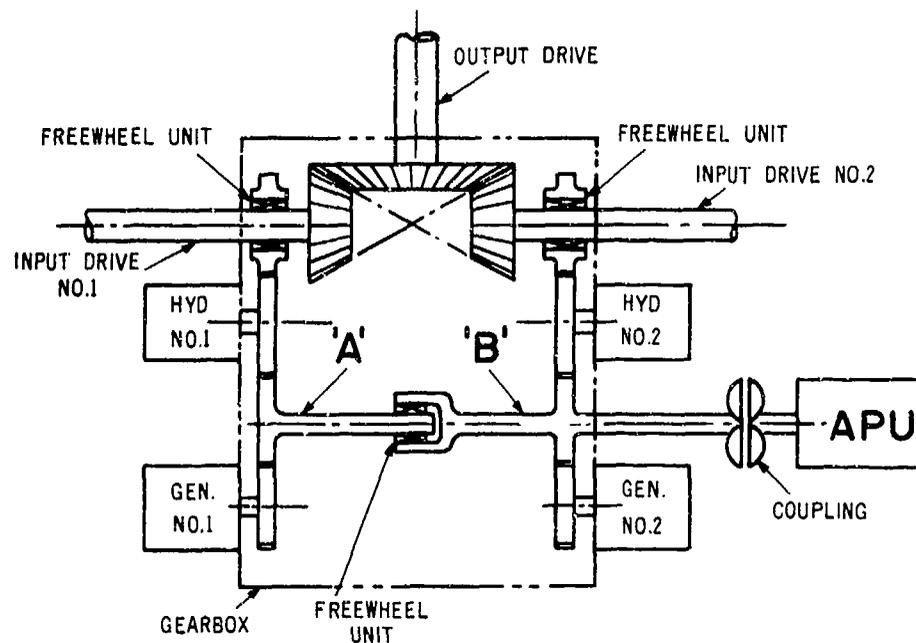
Accessory Drive Arrangement for Hydraulic and Electrical Systems
